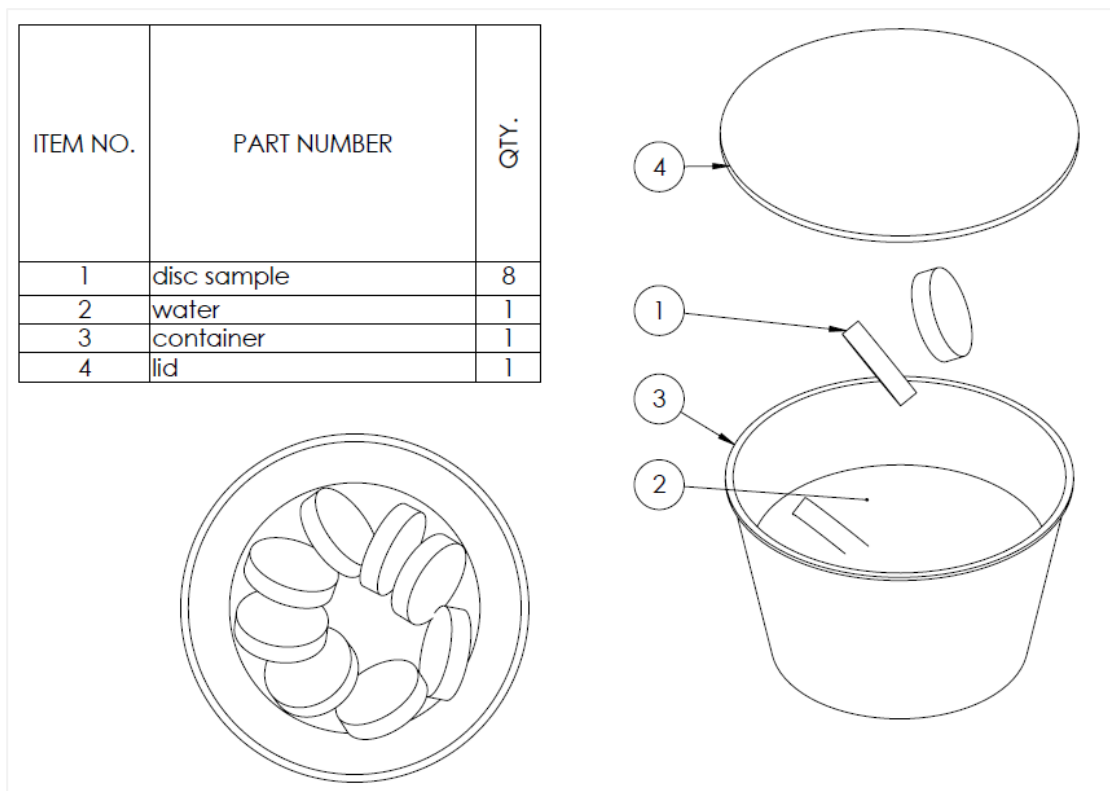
Assembly drawing of the components for the absorption experiment for disc-shaped samples
